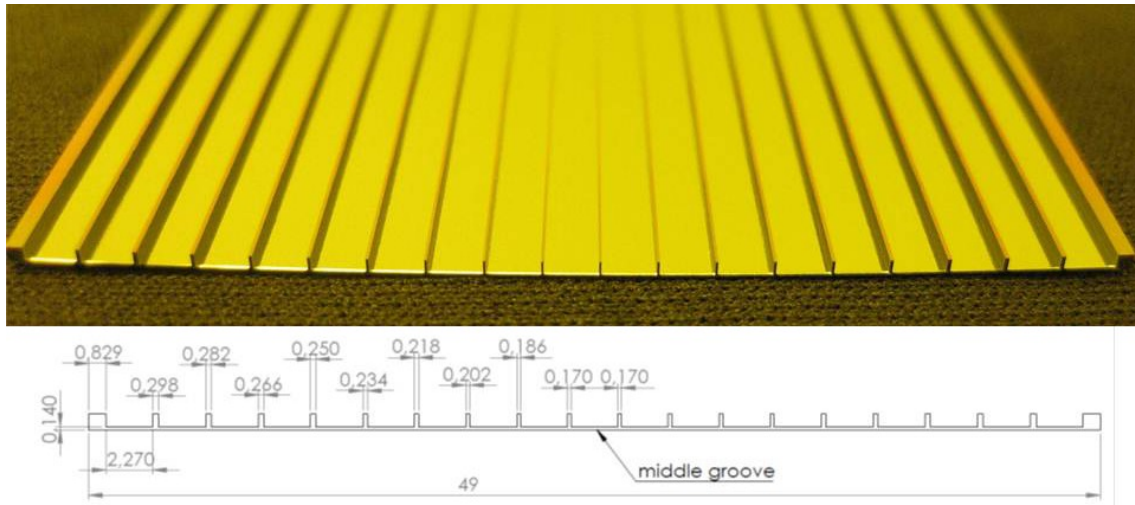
Inner mirror plate (radius 250 mm) with a width of 49 mm, large rib spacing (2.27 mm) and thinner membranes (140 μm thick mirrors). This mirror plate has been manufactured in preparation for the production of the first inner mirror module for Athena. The mirror plate production equipment was upgraded to maintain the good production yield despite the tighter requirements.
